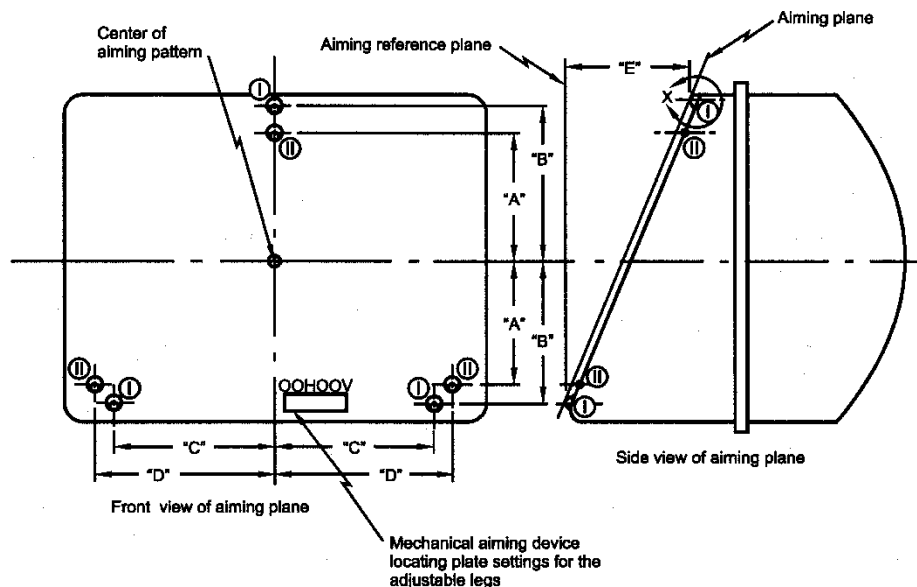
Dimensional specifications for location of aiming pads on headlamps
